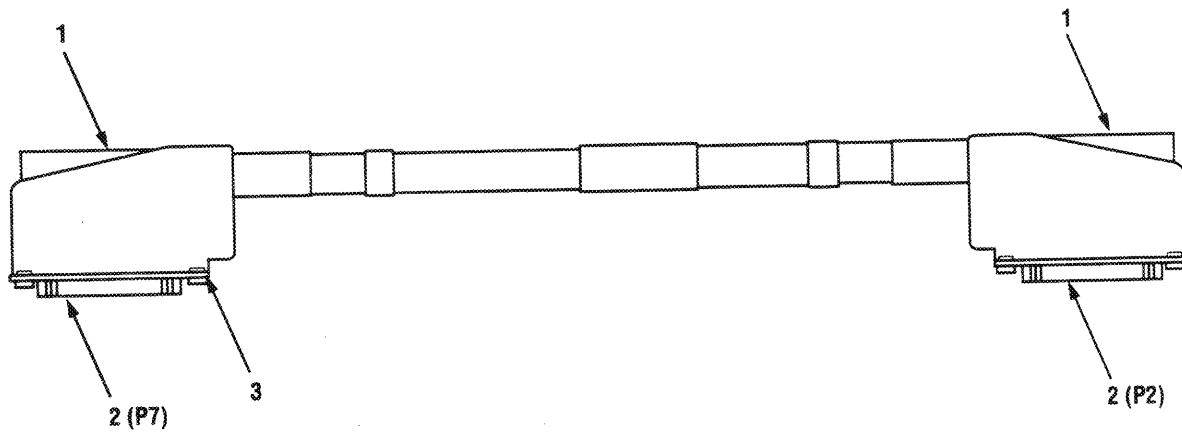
Cable Assembly W63 (3-94306.0000//B)
